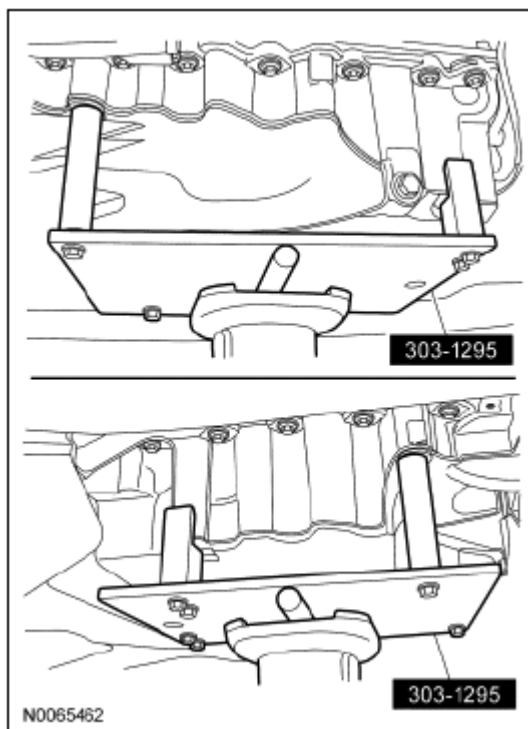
Positioning Floor Jack & Oil Pan Holding Fixture
